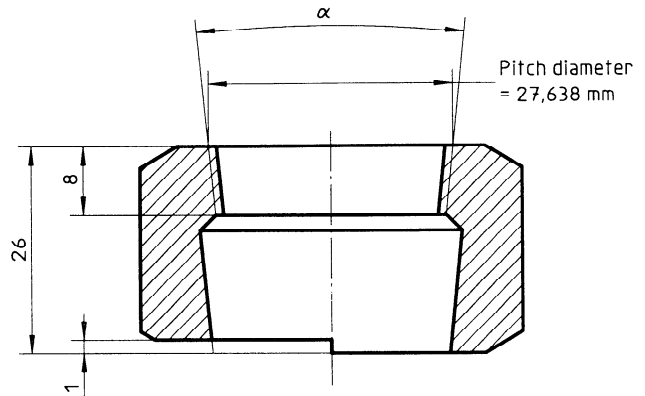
Threaded ring gauge for pitch diameters "I-12"
